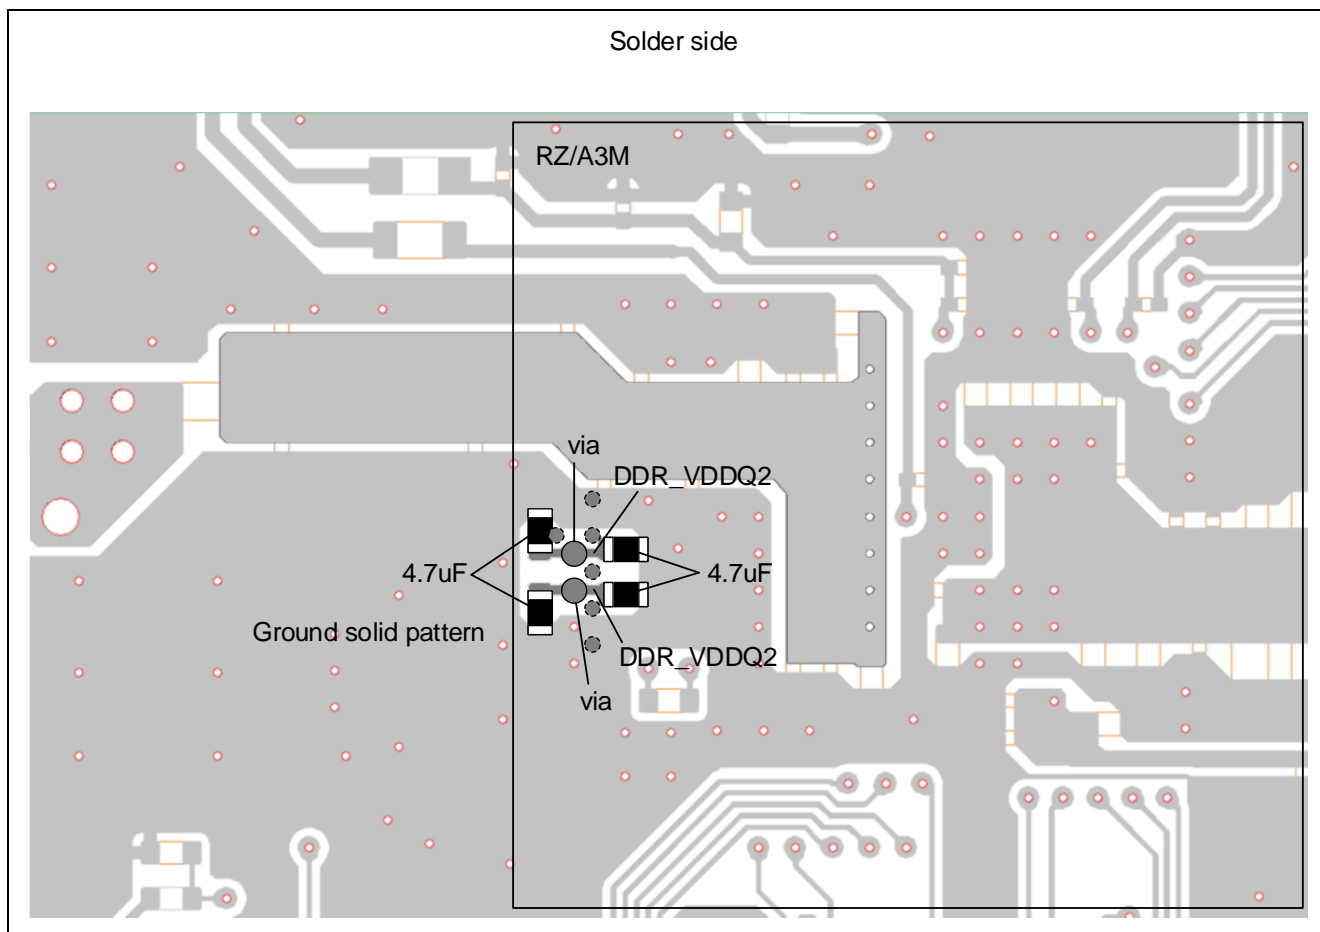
Pattern image of DDR3L power supply (DDR_VDDQ2) and external parts (Solder side)
